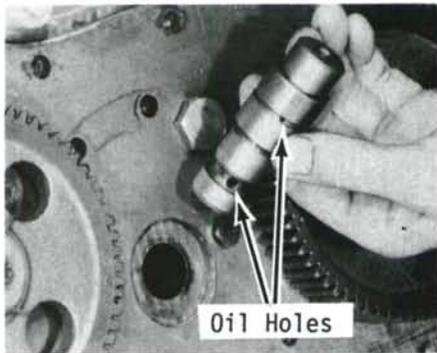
When installing idler shaft, be sure oil holes are positioned downward toward the crankshaft.
